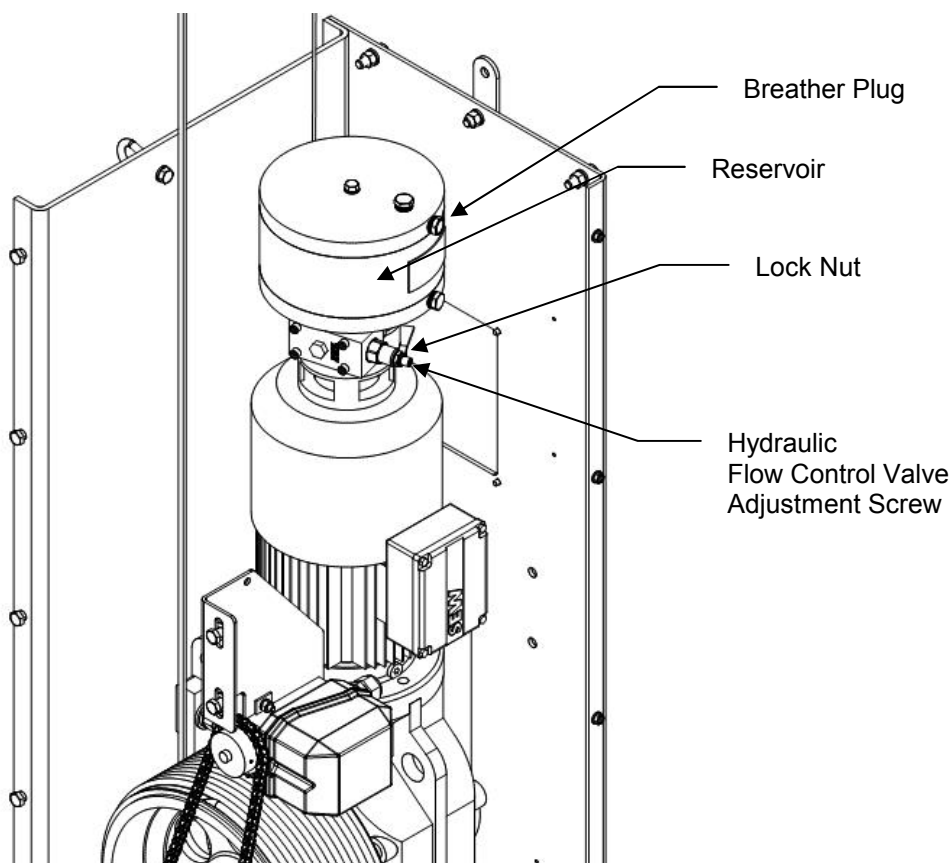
Hydraulic Dampener Assembly (Covers removed for illustration)
